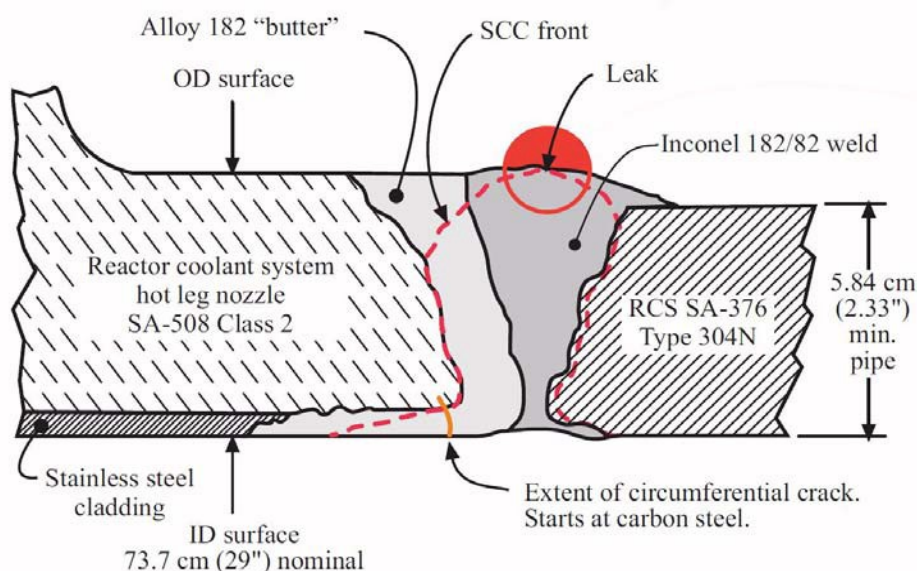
Schematic of the Alloy 182 weld used to join stainless steel piping to the RPV nozzle.
